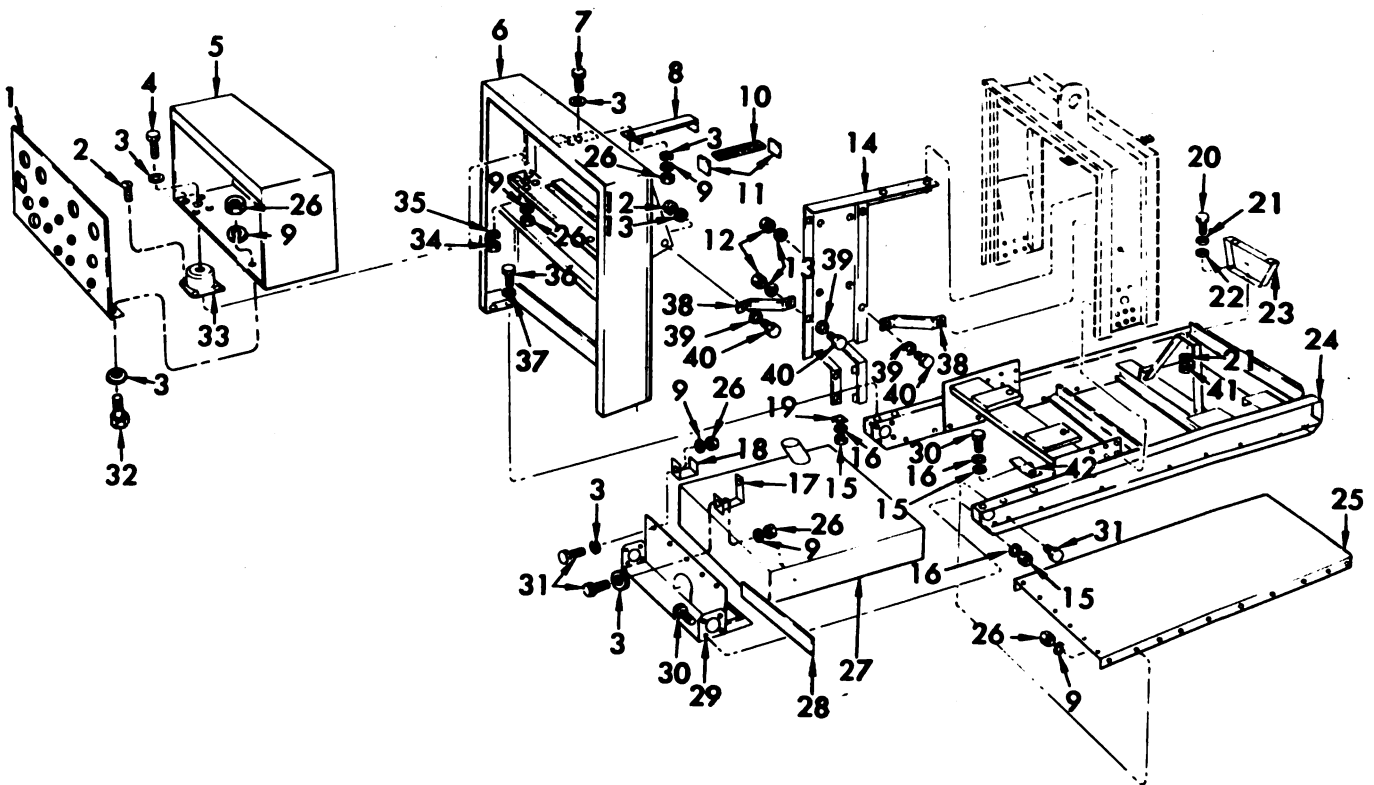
Skid Base and Attaching Parts, Removal and Installation
